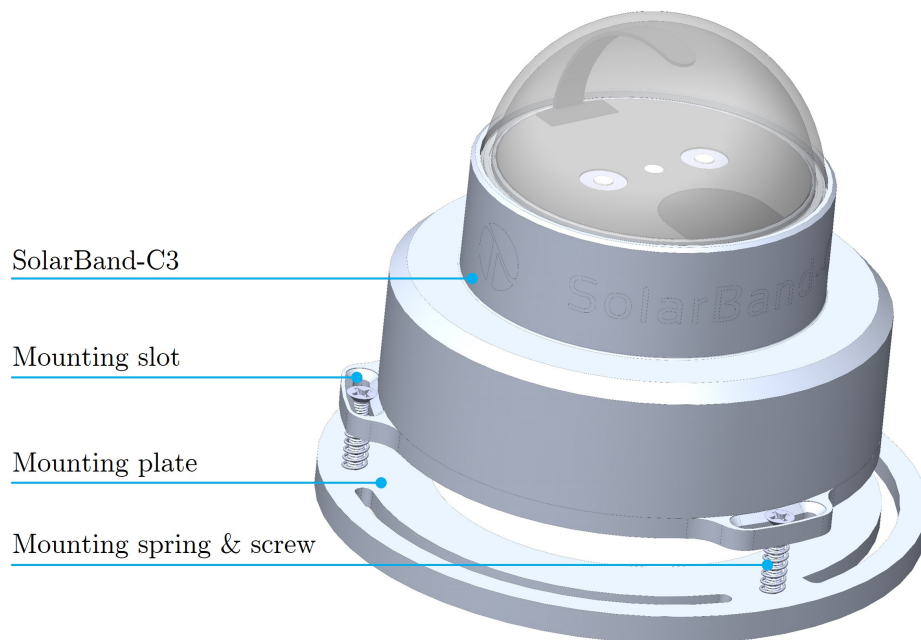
Assembled SolarBand-C3 on a mounting plate.
